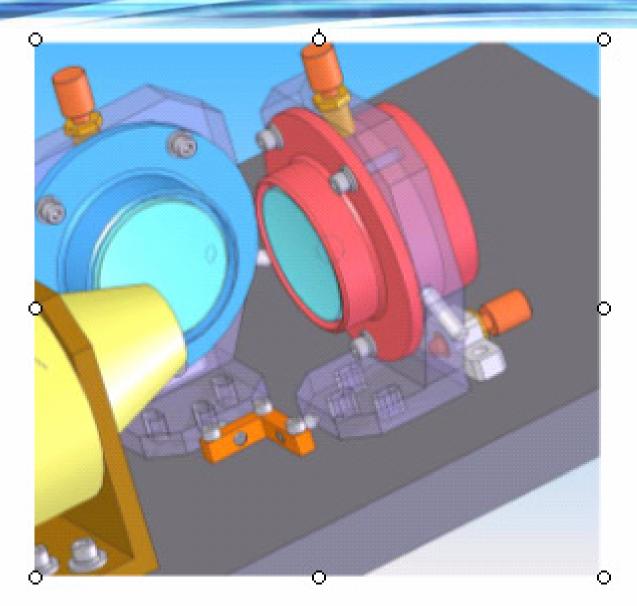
Top level assembly showing alignment jigs on two lens holders.
